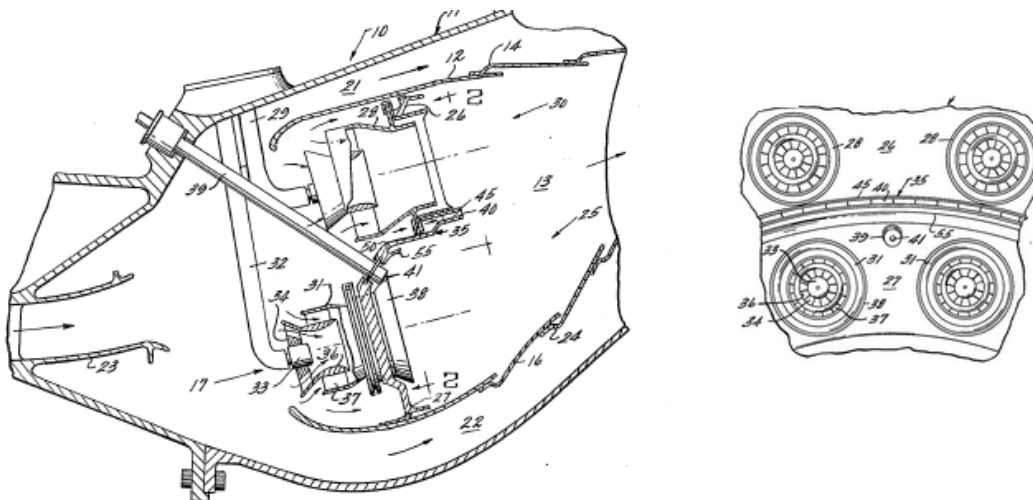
On the left of this figure, it is represented an axial cross-sectional view of a double annular combustor, and on the right, a front view of the injectors are displayed [22].
